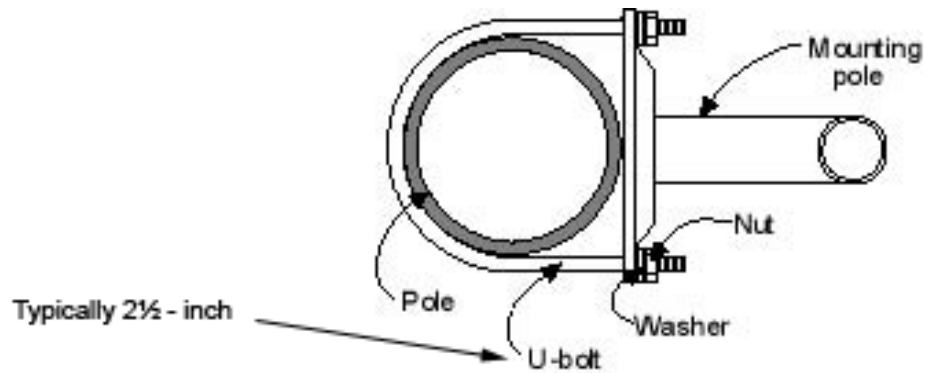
Mounting Pole Installed on Pole or Antenna Mast
